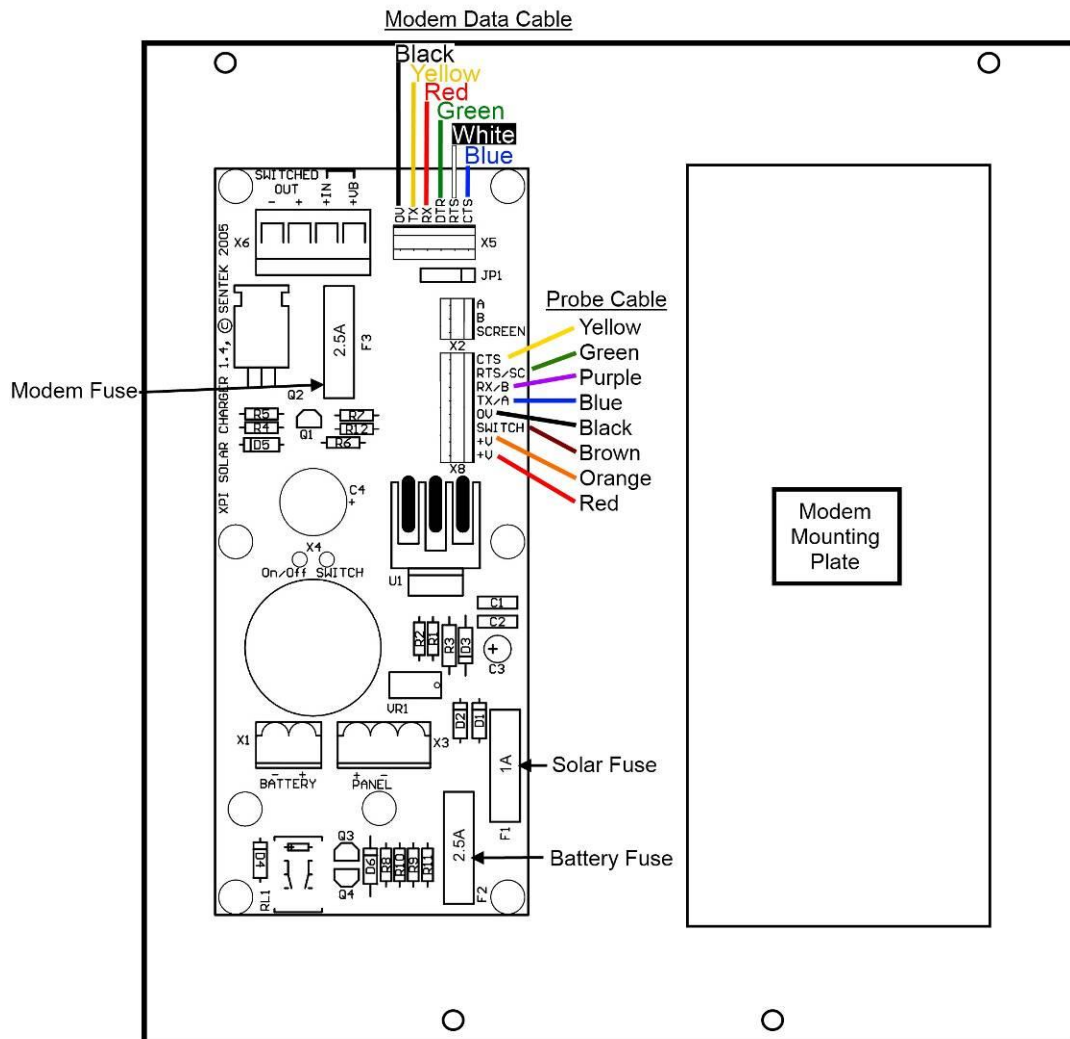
Rear of Sentek PLUS Front panel showing charger and Modem layout
